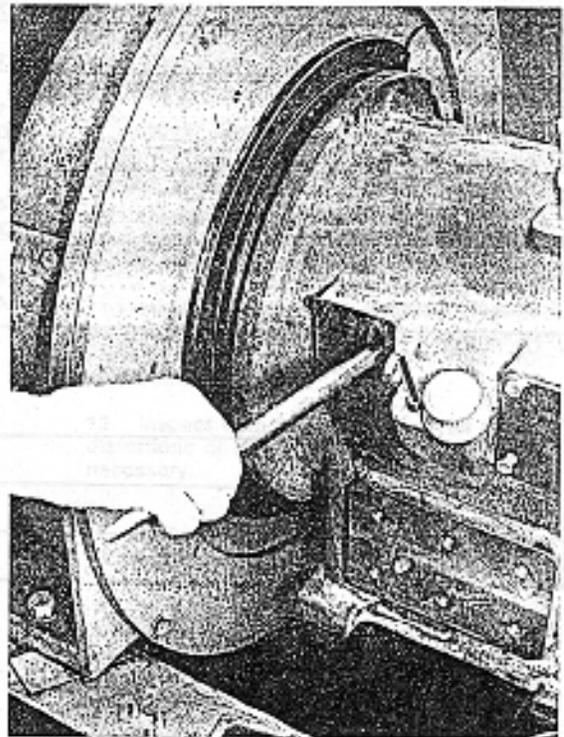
Maintaining Clutch in Housing during Removal of Transmission.
